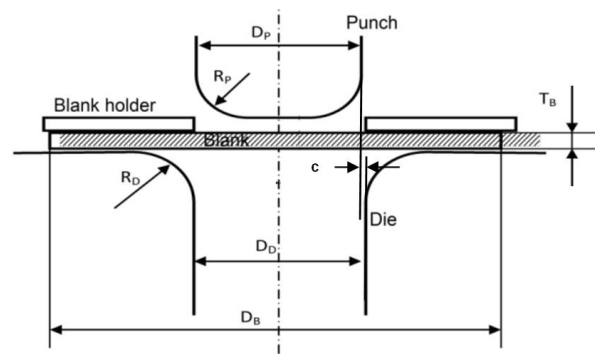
Geometric dimensions of the blank and tools [10]
